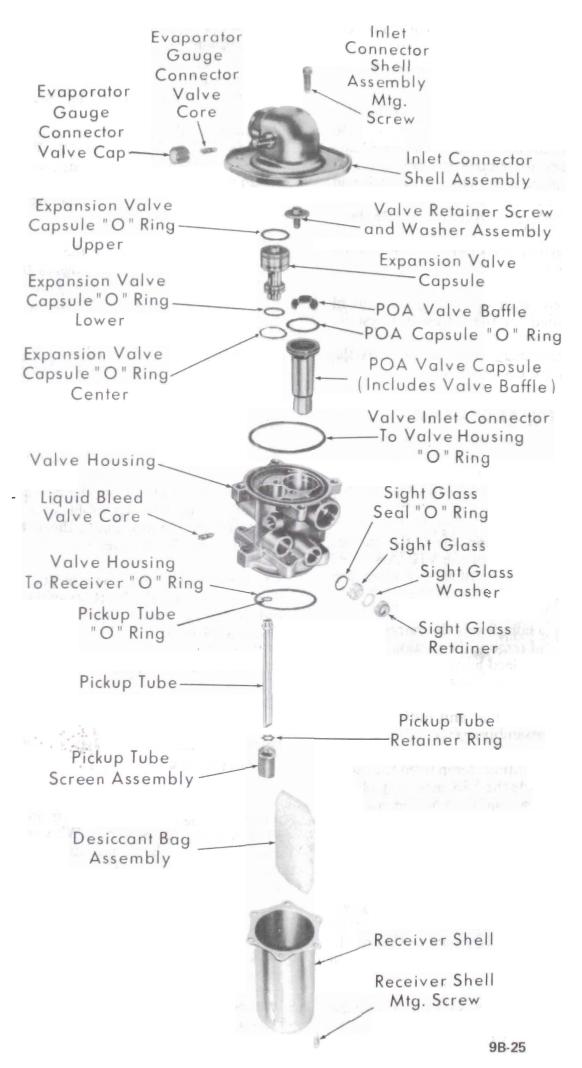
B-28 Exploded View - Valves in Receiver Assembly
